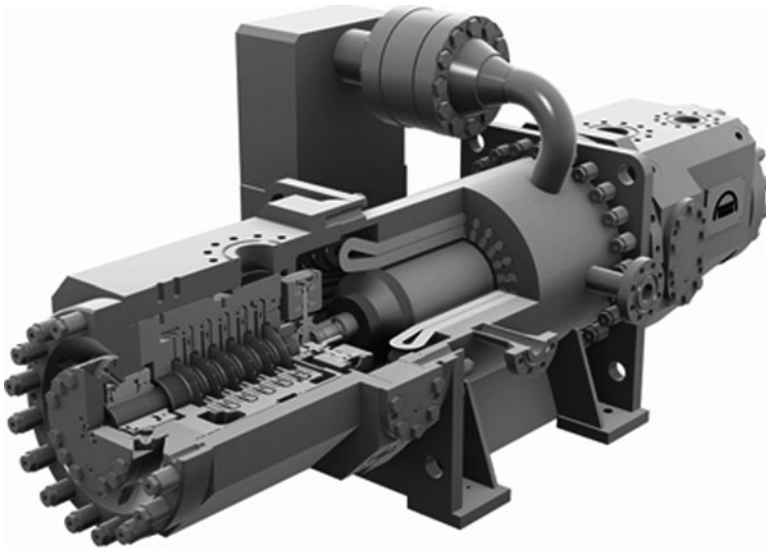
Pipeline compressor HOFIM for natural gas: integration of direct drive and magnetic bearing in the turbomachine, 6 MW, 9,000 rpm (courtesy MAN Turbo/S2M)
